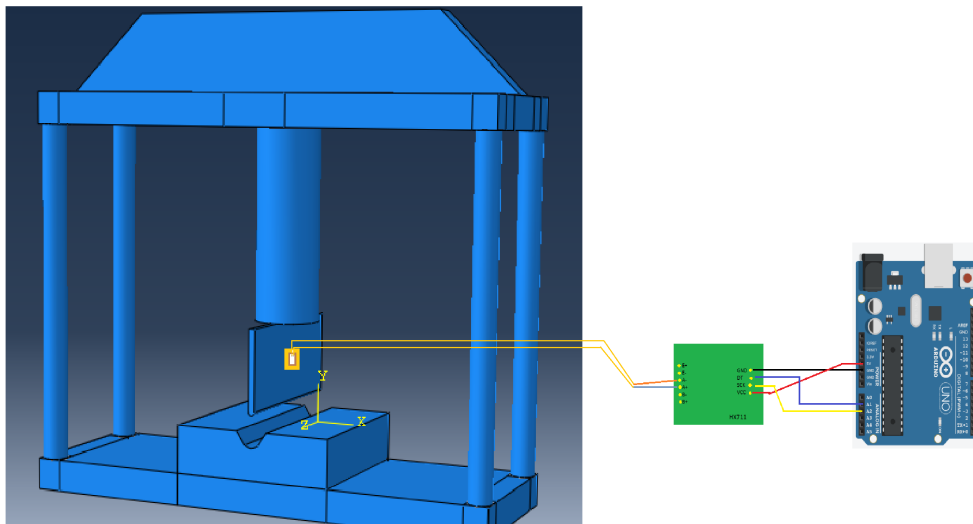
Schematic drawing illustrating how Arduino’s device should be connected with the project.
